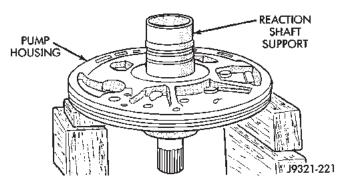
Assembling Reaction Shaft Support And Pump Housing
